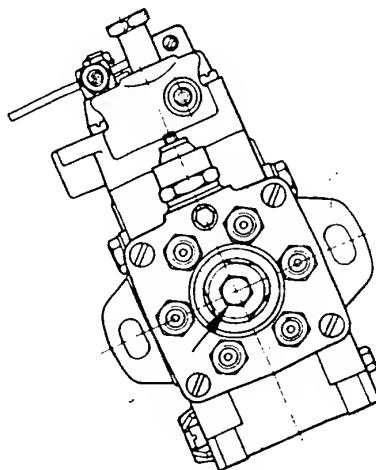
Horizontally or obliquely installed distributor-type fuel-injection pump
